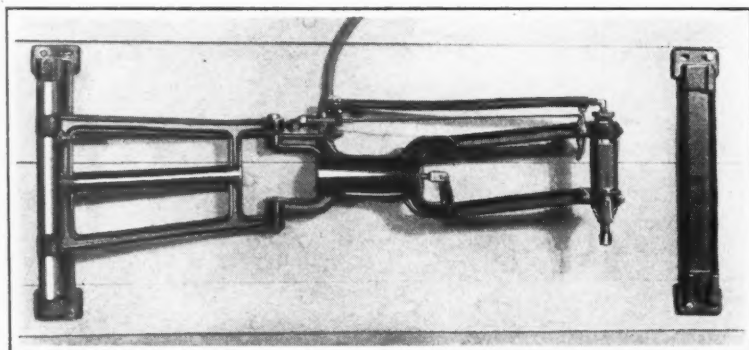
"Mikrotast" Gage for Checking Wire and Sheets
